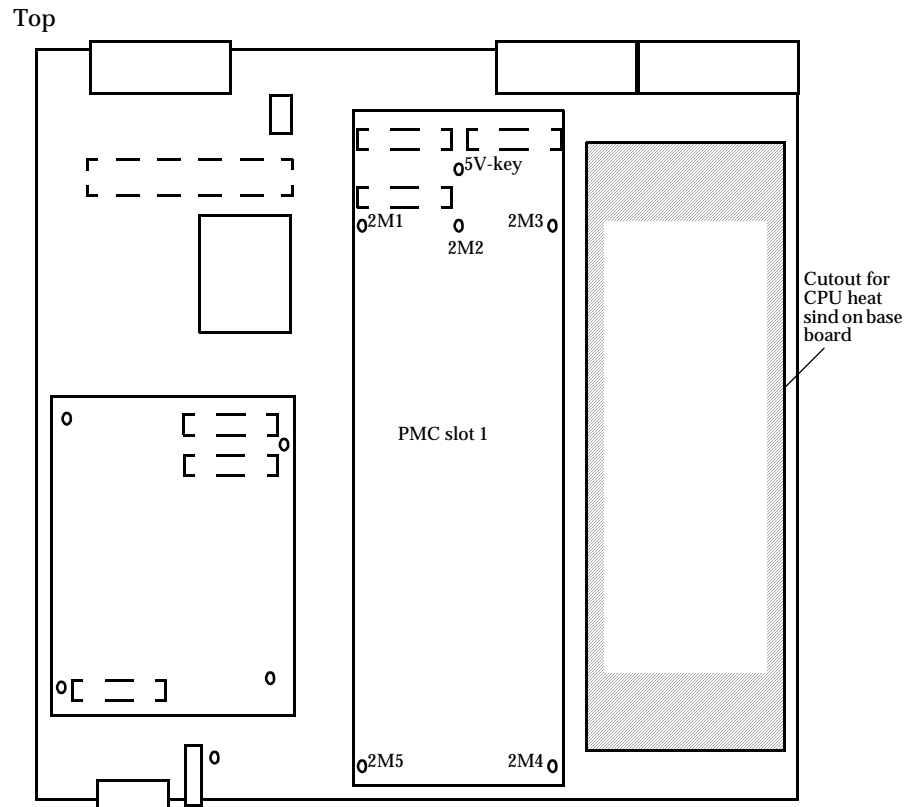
Mounting Points 2M1, ..., 2M5 of PMC Module on the I/O-721
